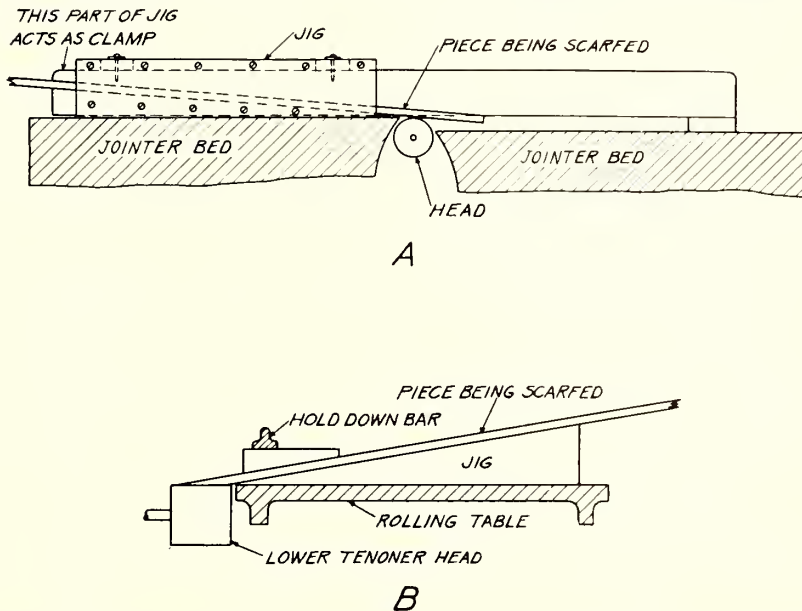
Scarfing. *A*, jointer. Stock is clamped on inclined jig and passed over jointer head. Final pass is light, to produce straight cut; *B*, single-end tenoner adapted with beveled jig and hold-down bar for scarfing.
